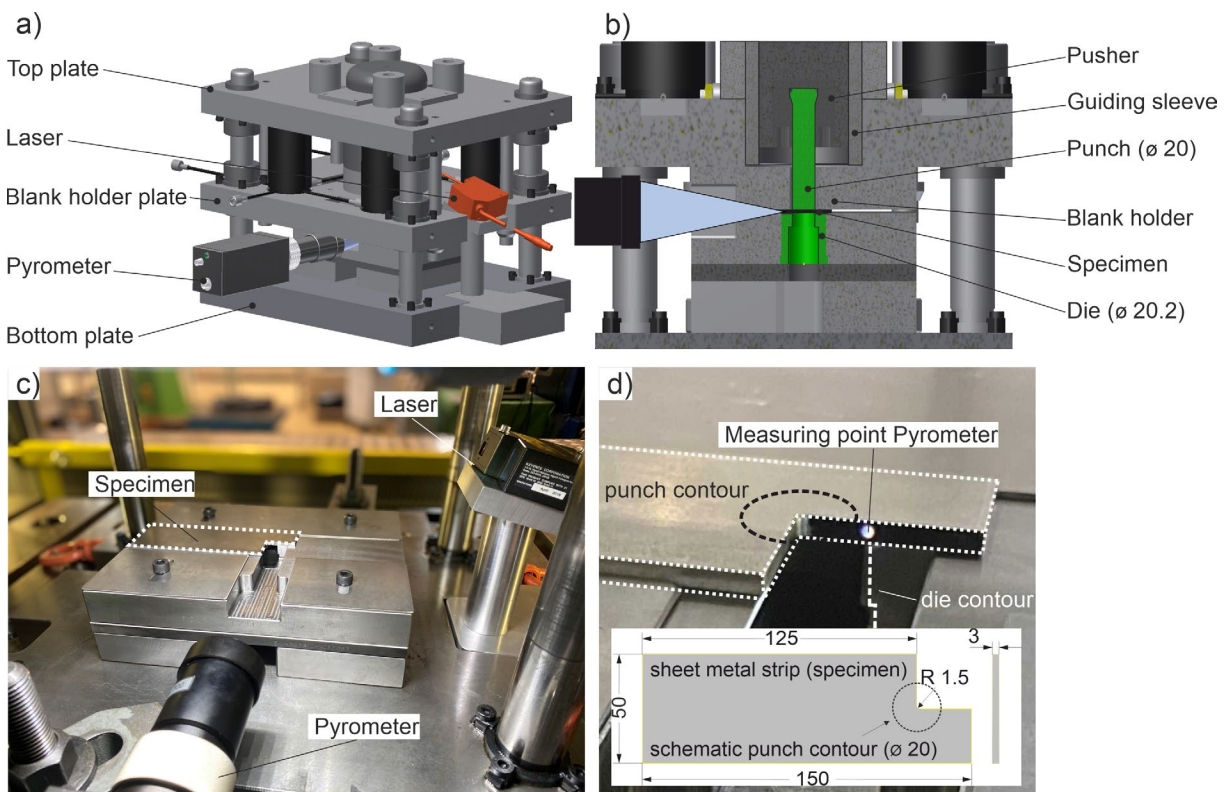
Experimental setup for the HSIC tests. a) and b) CAD drawing of the tool with positioning of the measuring equipment and the relevant components. c) and d) Specimen geometry and position of the measuring point of the pyrometer.
